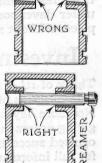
Wrong and right ways to ream bushings in wristpin bearings
